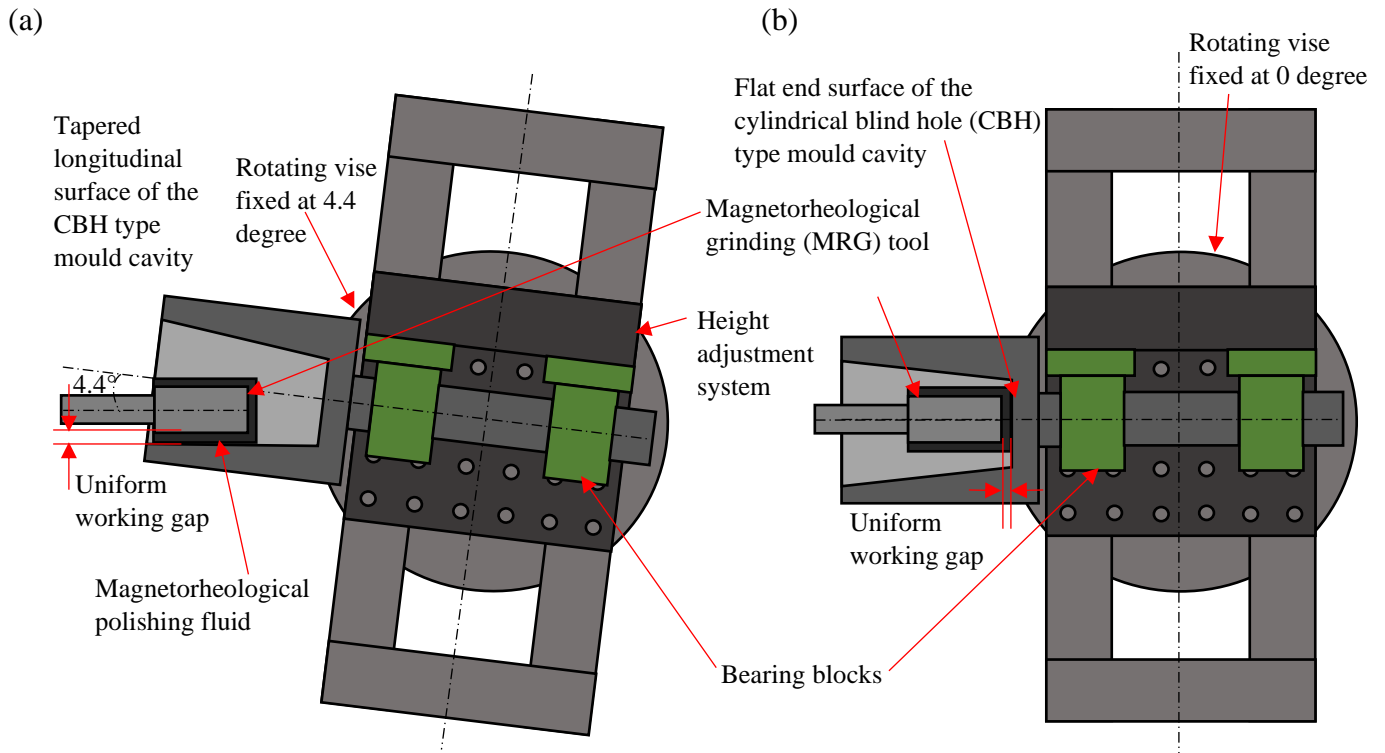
Schematic diagram of the experimental setup of the magnetorheological grinding process during finishing of the (a) tapered longitudinal surface, and (b) internal flat end surface of the CBH type mould cavity.
